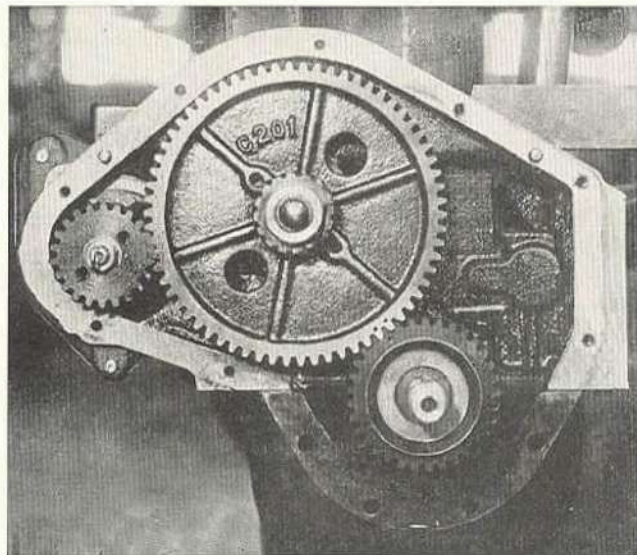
Timing gears exposed showing punch marks on Cam and Crankshaft Gears to facilitate timing.
